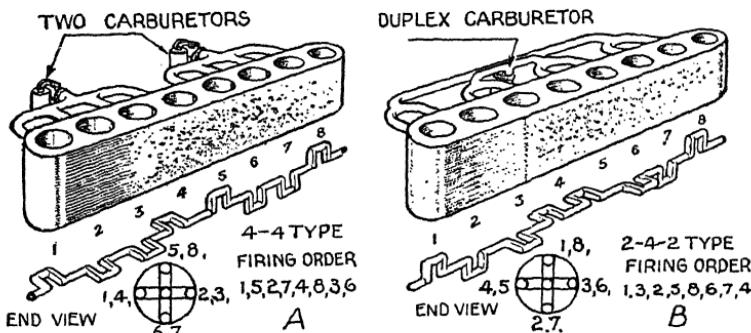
The 4-4 Straight-Eight Engine Shaft Is Shown at A and the 2-4-2 Straight-Eight Engine Shaft Is Shown at B
